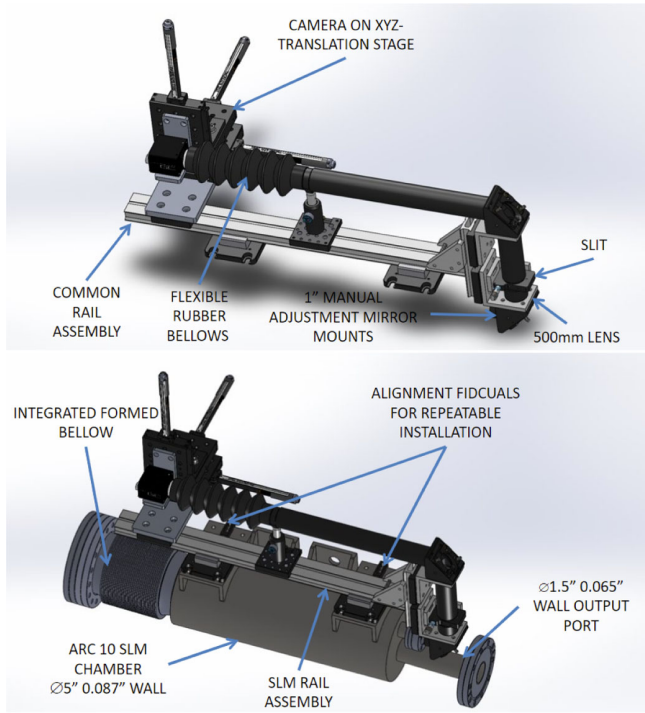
Modular SLM assembly on rail system and mounted to the arc 10 vacuum chamber.
